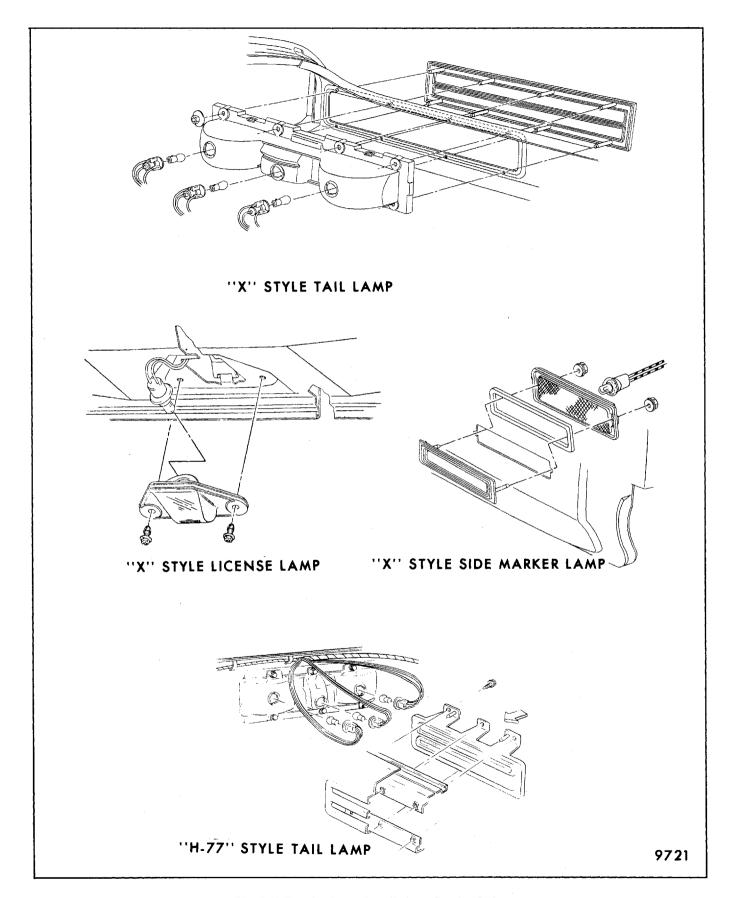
Exterior Lamp Installation - Pontiac Styles
